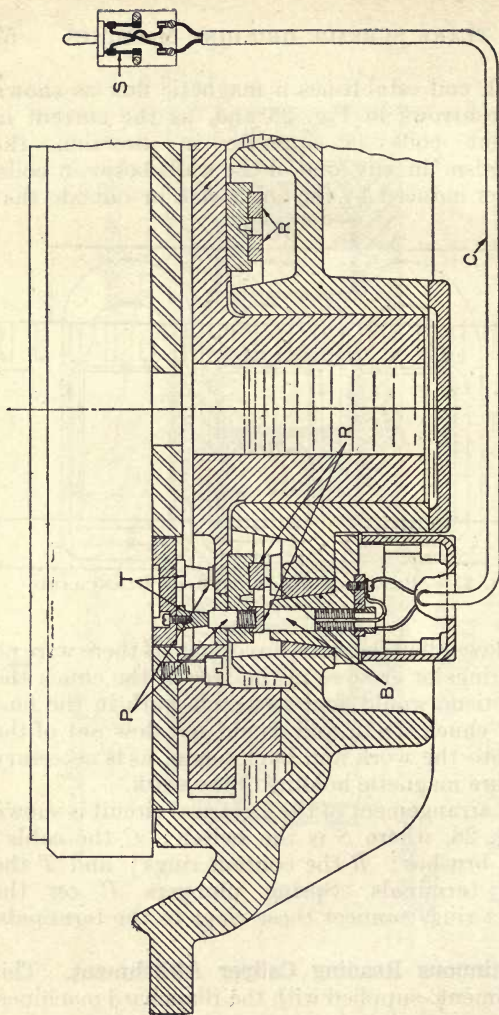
SECTION THROUGH TABLE OF BLANCHARD GRINDER, SHOWING ELECTRICAL PARTS
